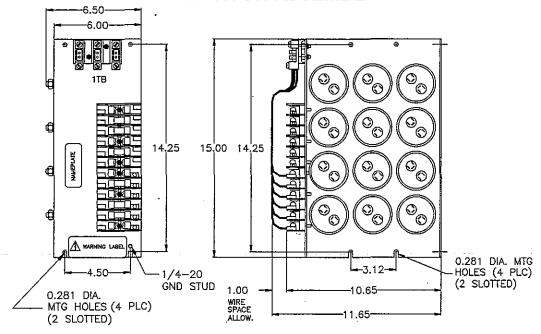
100 HP, 480 VAC Reactor Assembly Outline Drawing
